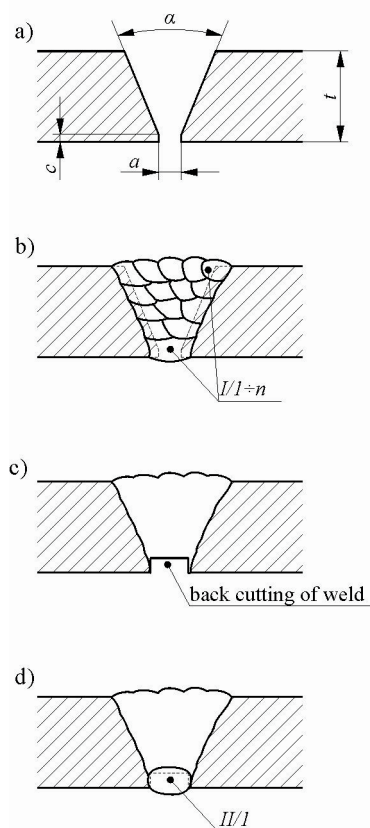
Welding technology of sample joints: a) main dimensions: $a = 2-3$ mm, $c = 0-1$ mm, $t = 10$ and 20 mm, $\alpha = 50^\circ$; b) welding part 1: joint filling with SG700 or X90 (I/1-n); c) back cutting of weld; d) welding part 2 with SG700 or X90 (II/1)
